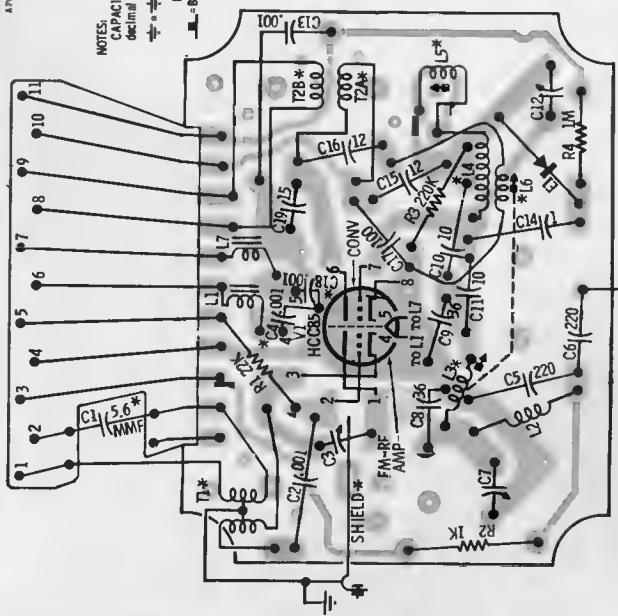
PLATED CHASSIS BOARD WIRING AS VIEWED FROM BOTTOM
